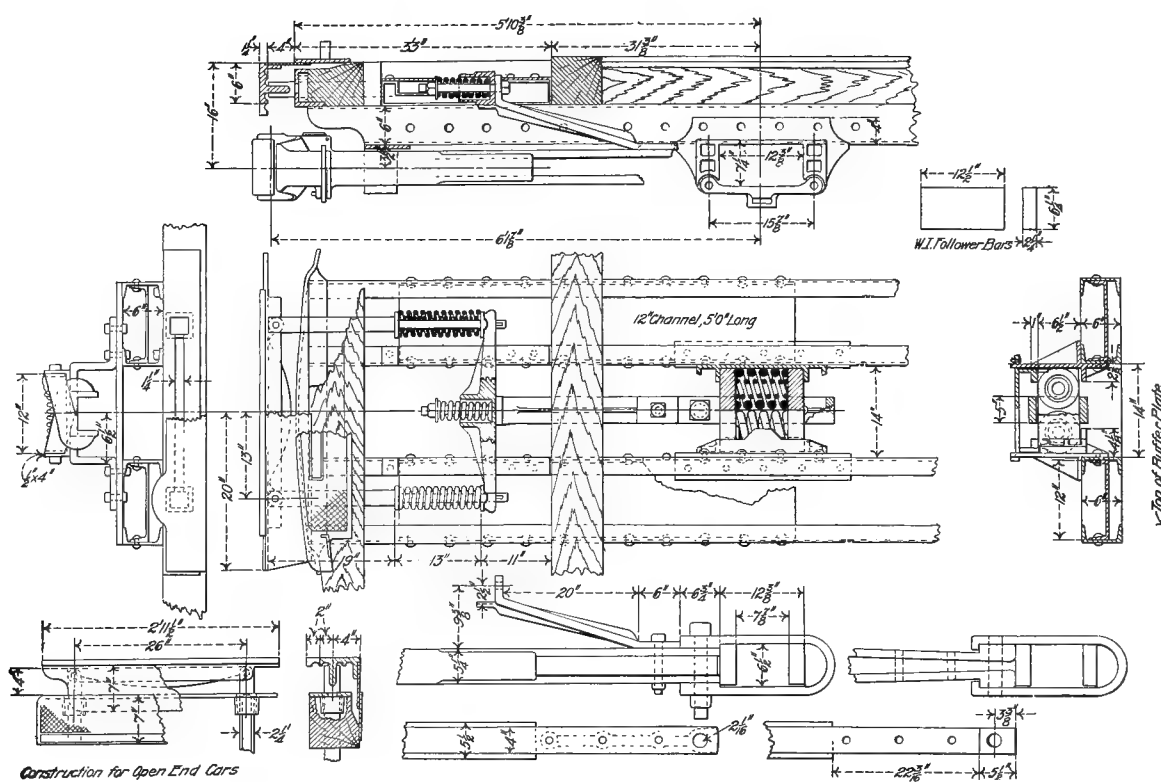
National Steel Platform and Buffer with Hinson Twin Spring Draft Gear, for Vestibuled and Open End Cars. National Car Coupler Company.
